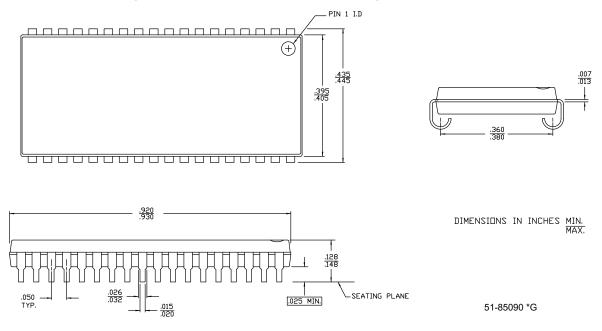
36-pin SOJ V36.4 (Molded) Package Outline, 51-85090
